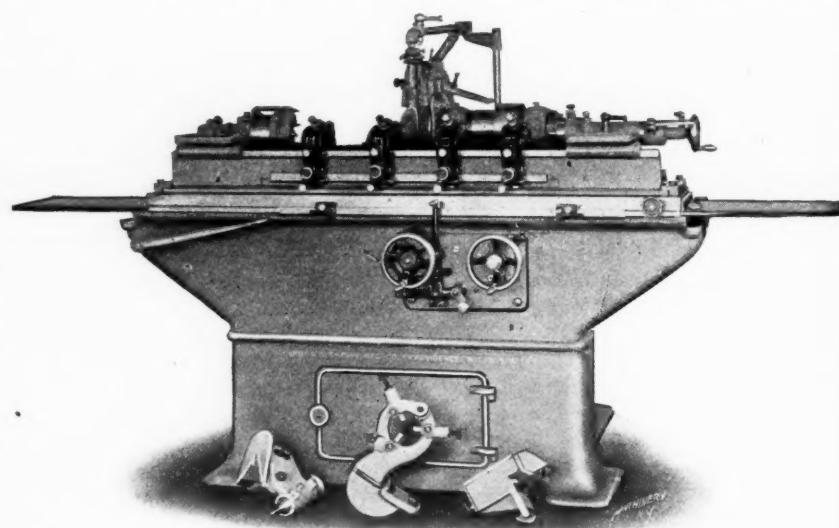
Brown & Sharpe No. 12 Plain Grinding Machine
